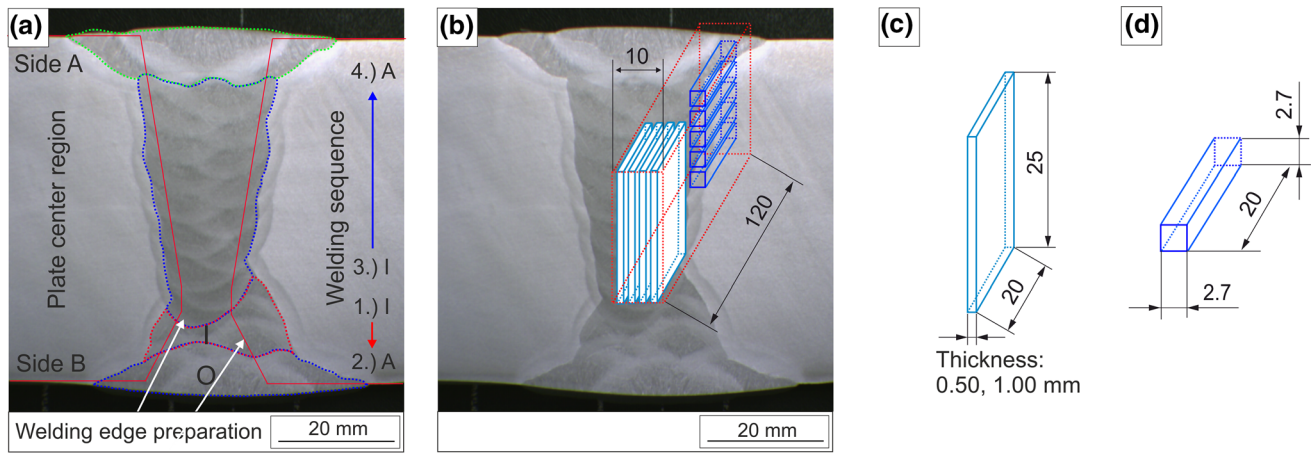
Specimen geometry: (a) cross section of weld joint, (b) specimen locations of extraction of (c) permeation and (d) carrier gas hot extraction specimens (Color figure online)
